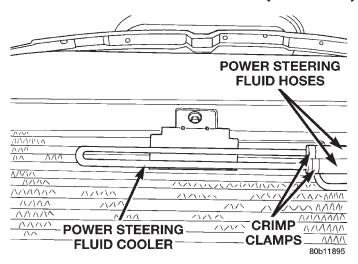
Hose Clamps At Power Steering Fluid Cooler
